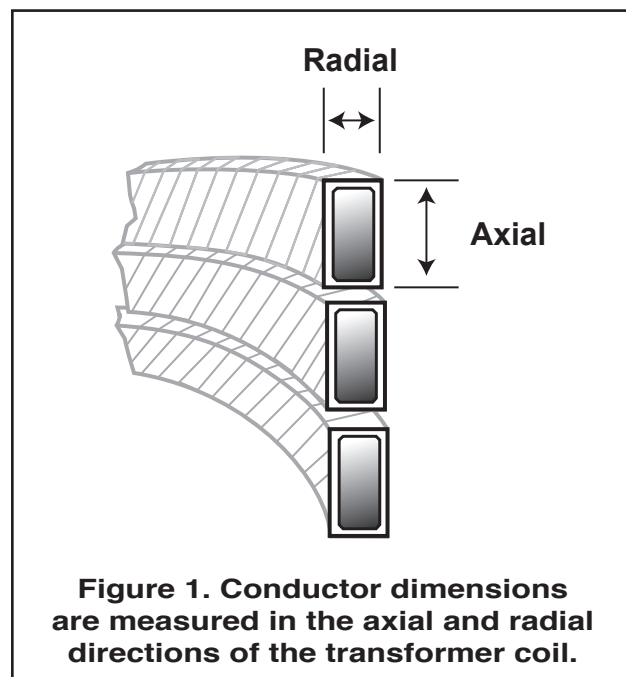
Conductor dimensions are measured in the axial and radial directions of the transformer coil.
